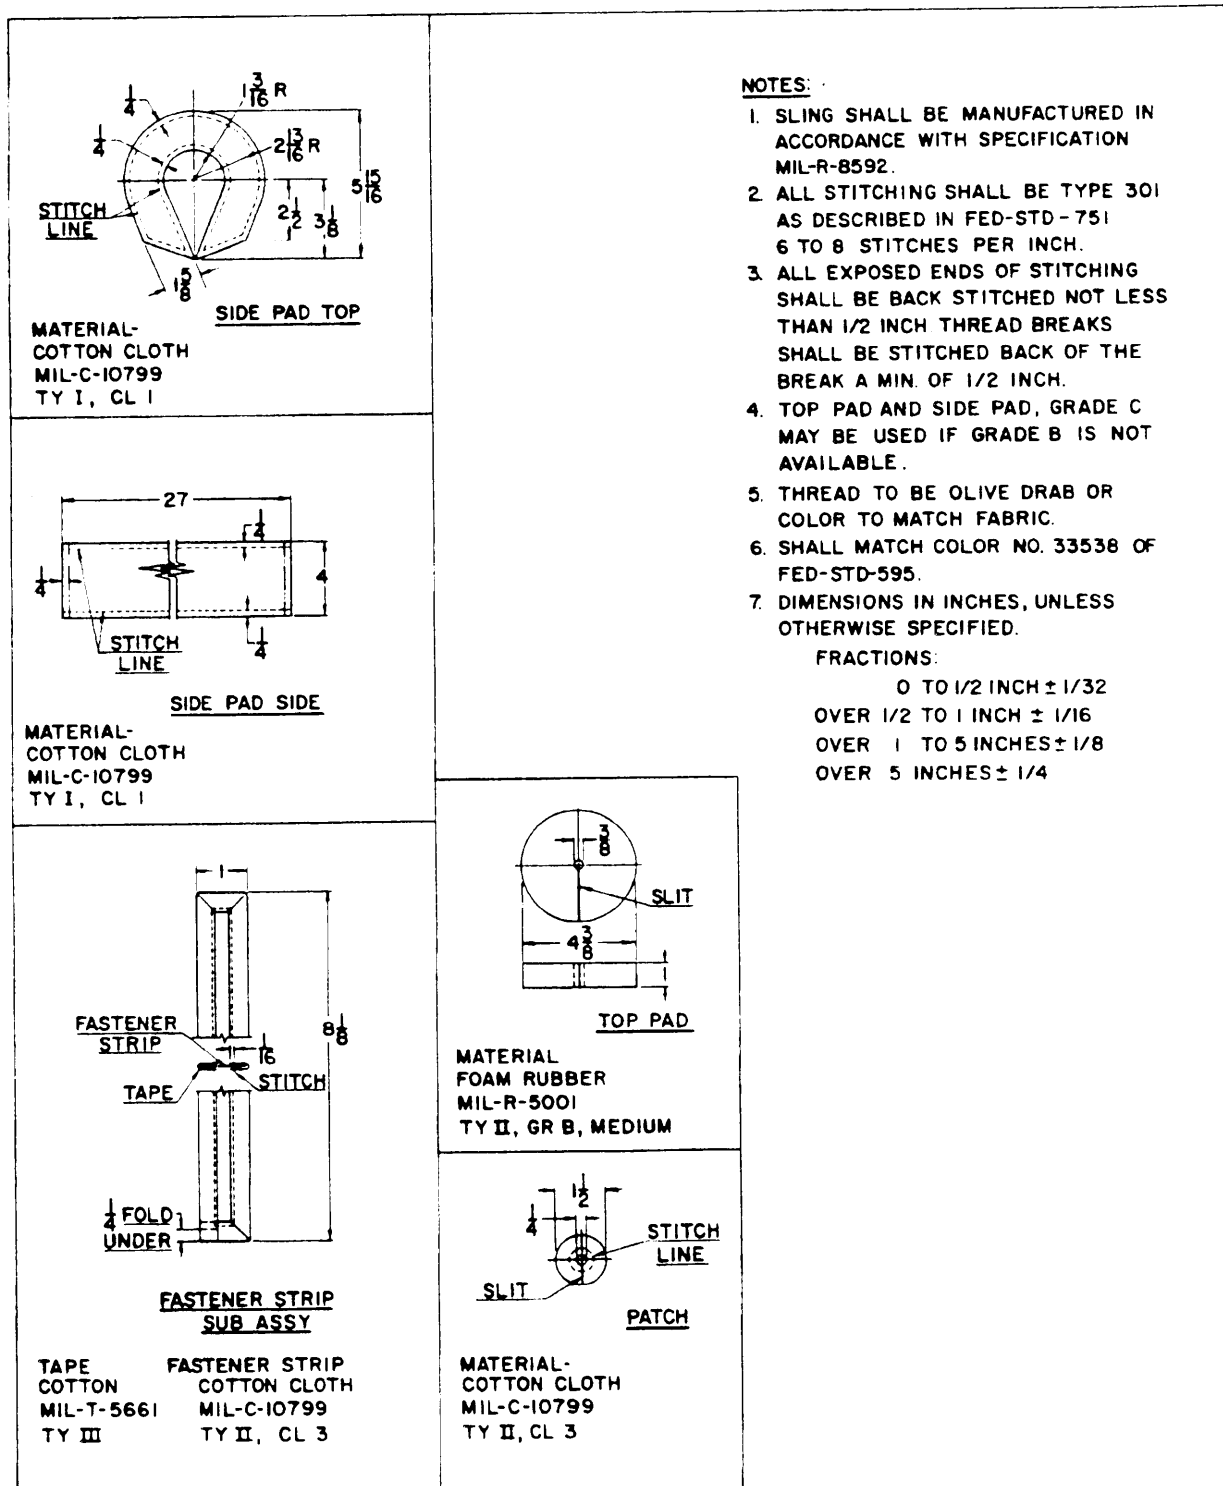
Cable Weight Cover Construction Details (Sheet 4)
